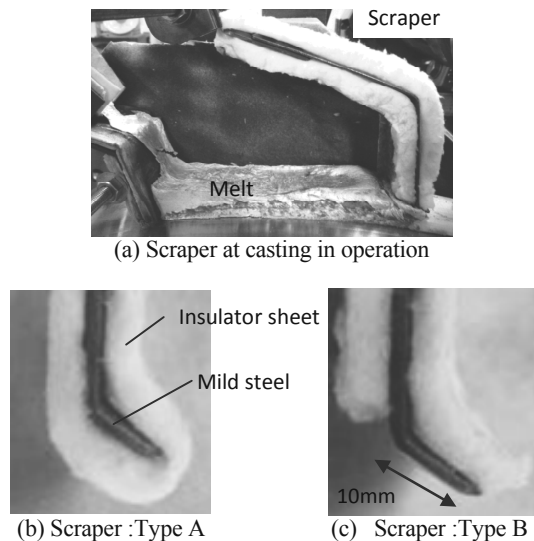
Photograph showing the scraper at casting in operation, two kinds of scraper
